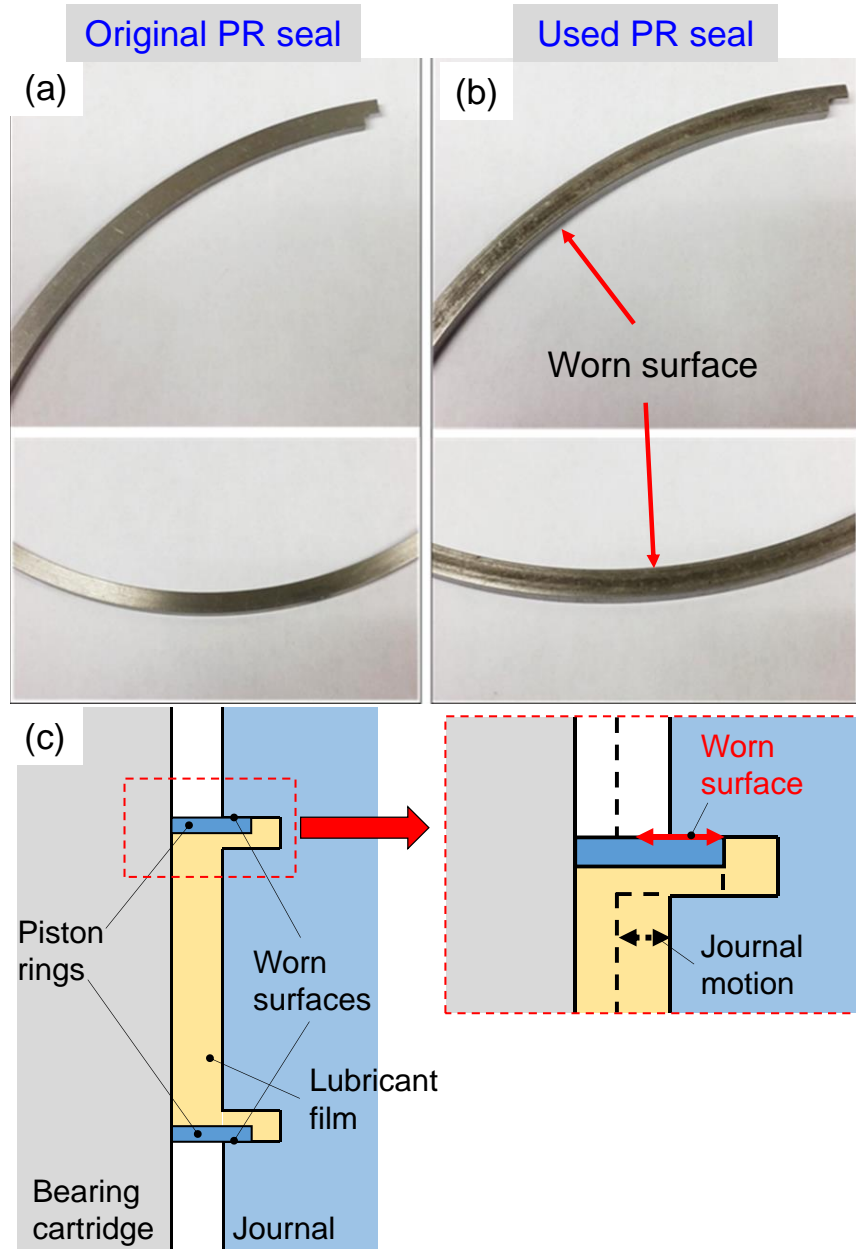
Photographs of (a) original piston ring (PR), (b) used PR with worn marks after dynamic load tests. (c) Schematic view shows locations of worn surfaces with PRs installed.
